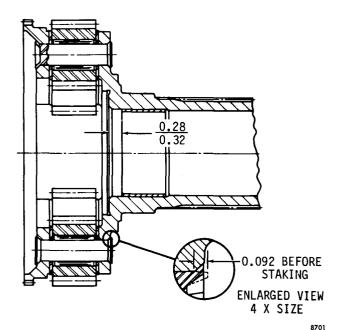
Forward planetary carrier assembly cross-sectional view
